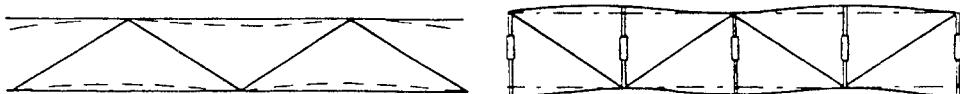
Pre-deformation of a welded lattice girder
